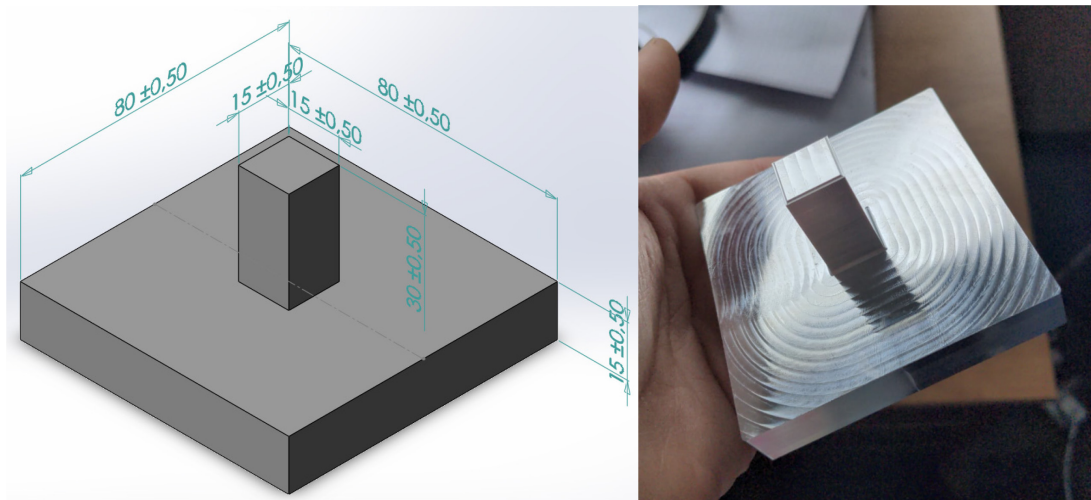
(left) & Figure 39 (right): Machined Aluminum Fixtures, with Dimensions in Millimeters in Figure 38
